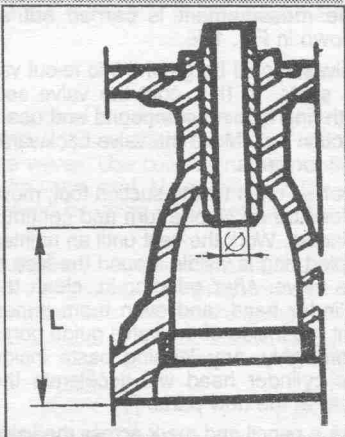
Dimension "L" determines the correct fitting depth of the valve guides (same dimension for inlet and exhaust valves).
